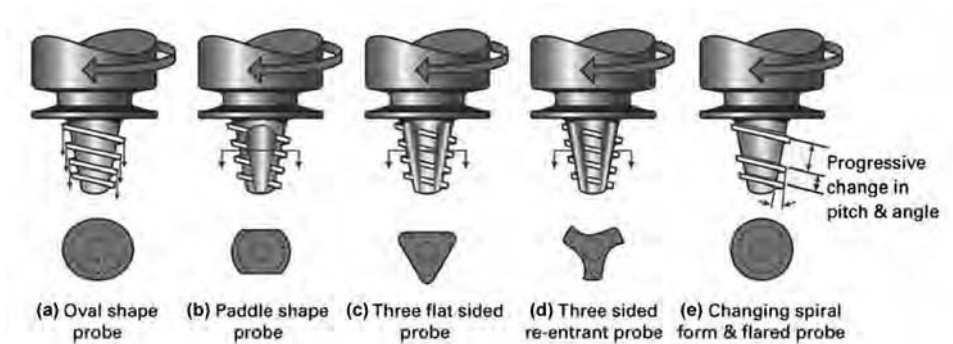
Representative variations of the Whorl tool (The Welding Institute), including both flats and square threads. Source: Ref 38
